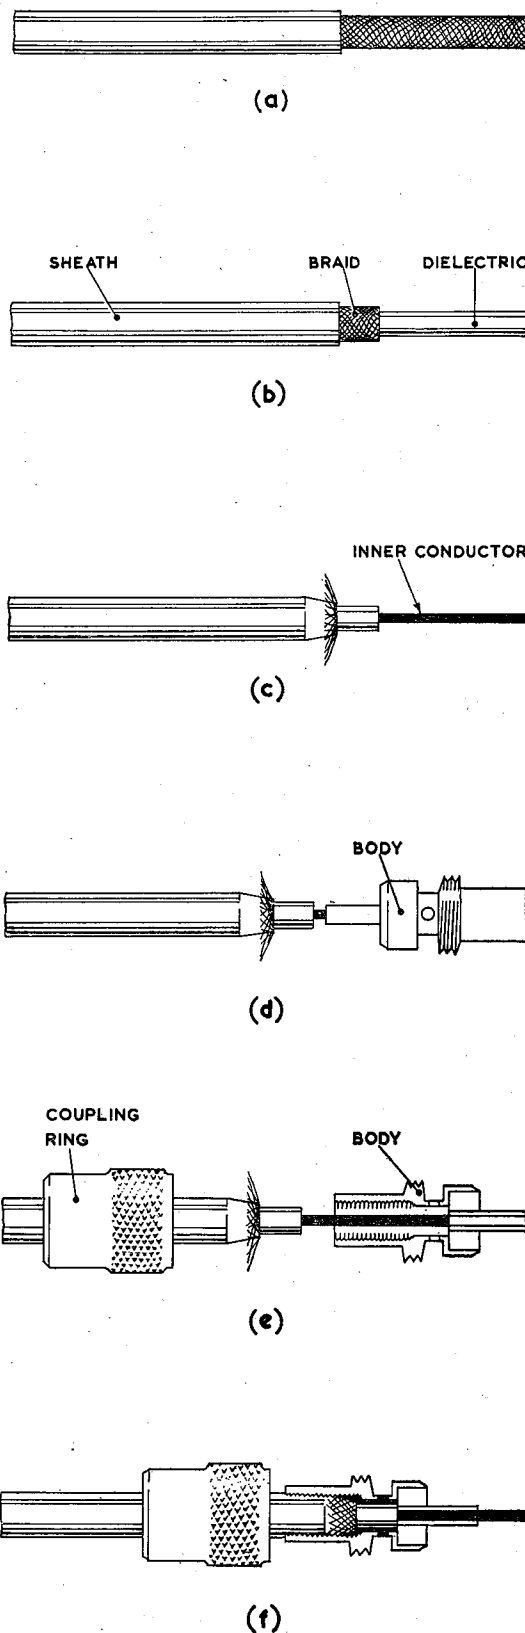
Straight plug assembly for frequencies to 300 Mc/s
